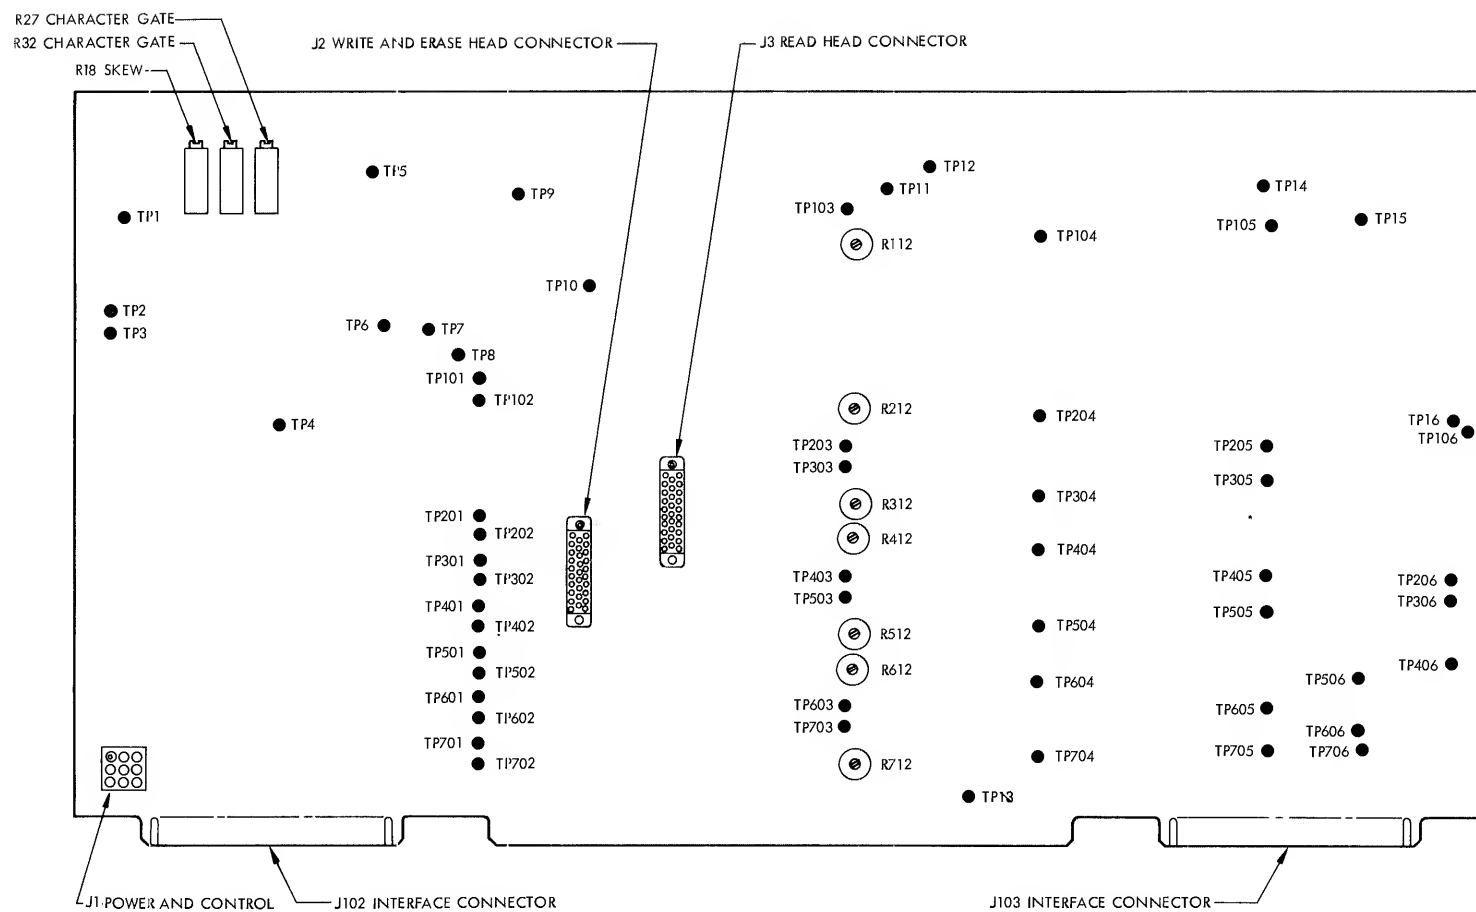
Data E7 PCBA, Test Point and Connector Placement
